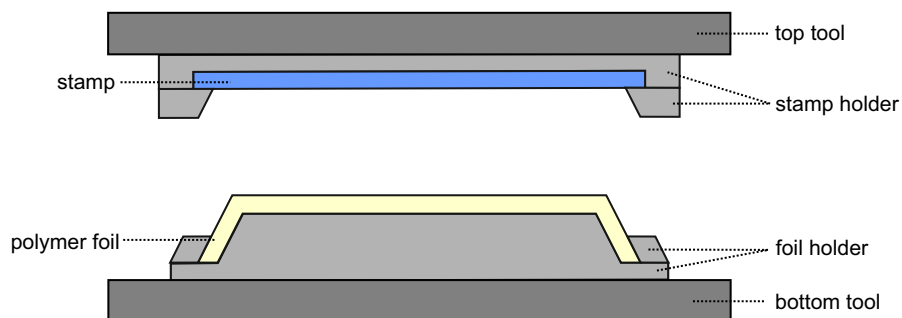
Schematic of the constructed demolding tools composed of stamp and foil holders.
